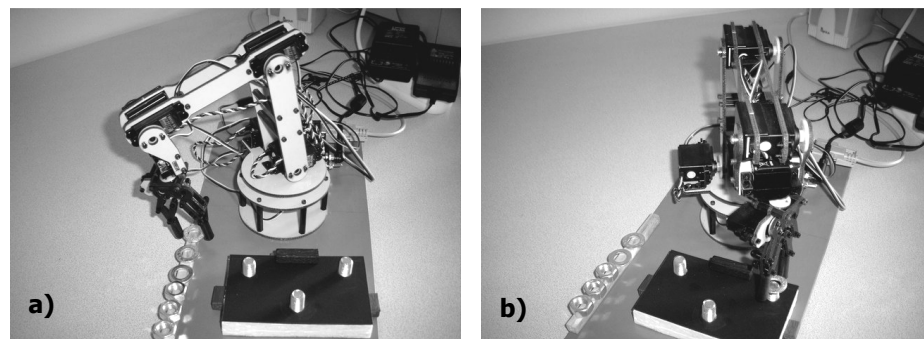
The assembling parts and Lynxmotion 6 Robotic Arm.
